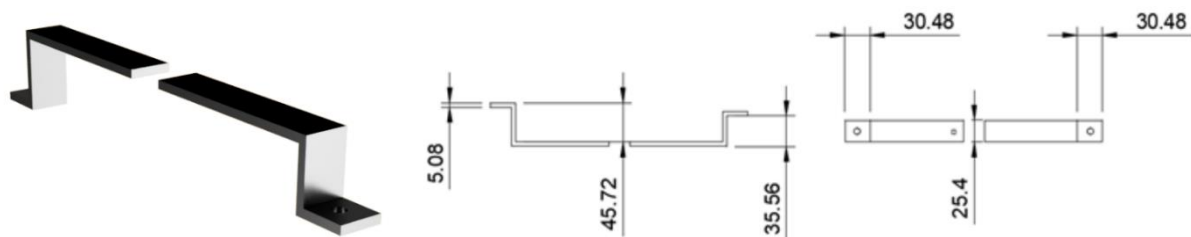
Dimensioned drawing of prism support arm from 3D printer file. Left, a 3D rendering of the finished item; Middle, side view; Right, top view. Units are in mm, round holes are 7.6 mm wide, square hole is 5 mm.
